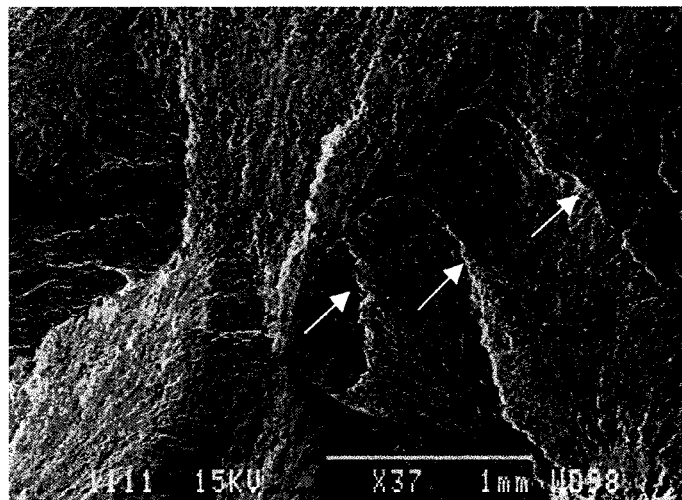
Illustration of marks, made by intermittent axial fatigue, (indicated by arrows that also show the radial crack growth direction) on the fracture surface of notched specimen under torsional fatigue.
